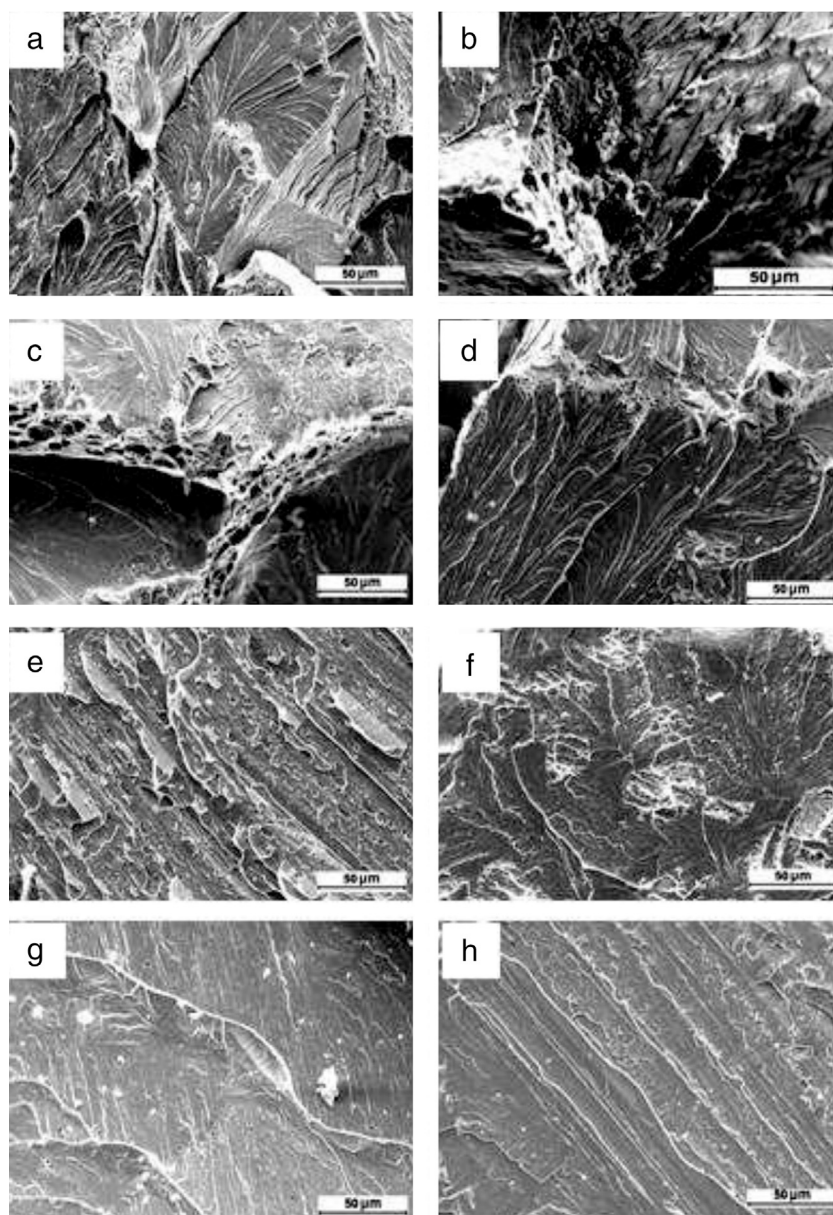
Fractographs of tensile (a–d) and impact specimens (e–h) of ferritic stainless steel weldments in post-weld annealed condition. (a) 1 g Al (1.7 wt.%) addition; (b) 2 g Al (2.4 wt.%) addition; (c) 3 g Al (6.2 wt.%) addition; (d) filler material (ER 430) addition without Cu and Al; (e) 1 g Al (1.7 wt.%) addition; (f) 2 g Al (2.4 wt.%) addition; (g) 3 g Al (6.2 wt.%) addition; and (h) filler material (ER 430) addition without Cu and Al.
